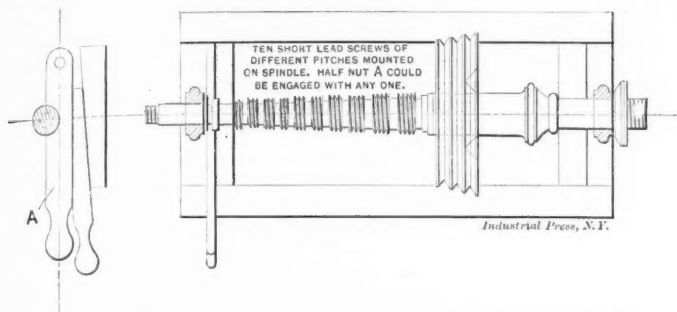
Early French Mandrel with Ten Leads of Thread for Thread Cutting.
